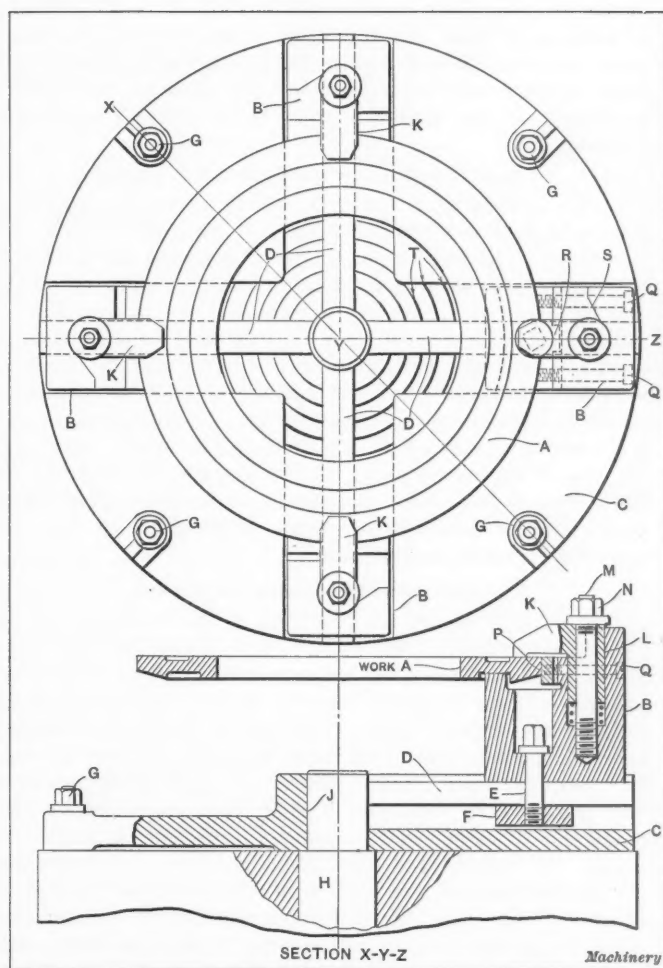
Special Fixture for holding a Number of Different Sizes of Bevel Gear Blanks on the Boring Mill
